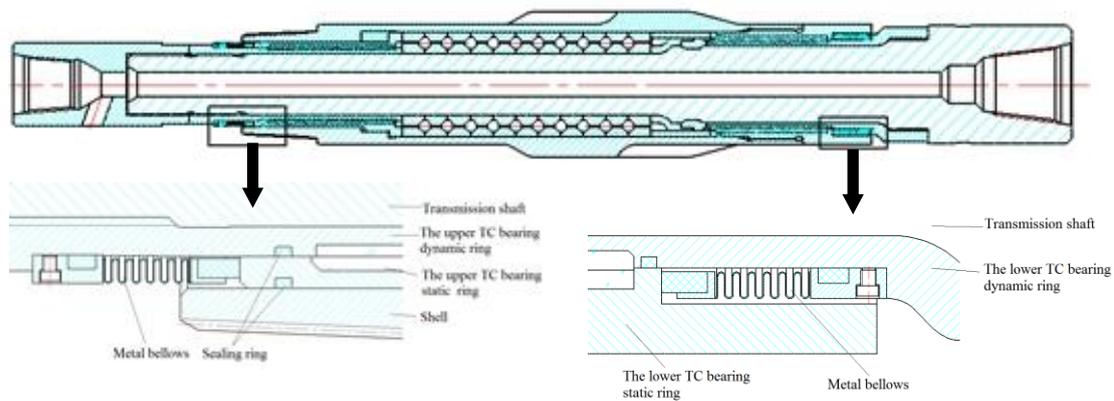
The structure sketch of oil lubrication transmission shaft assembly
